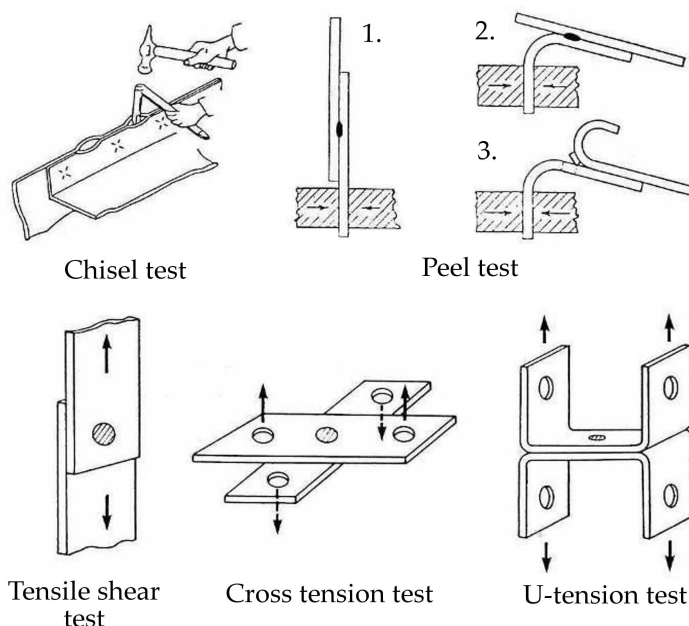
Destructive tests on spot welds according to [NIS 82].
